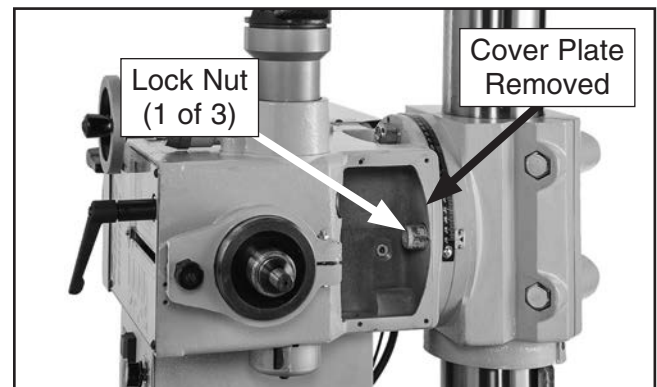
Cover plate removed from bottom of headstock (headstock tilted 90° for clarity).
